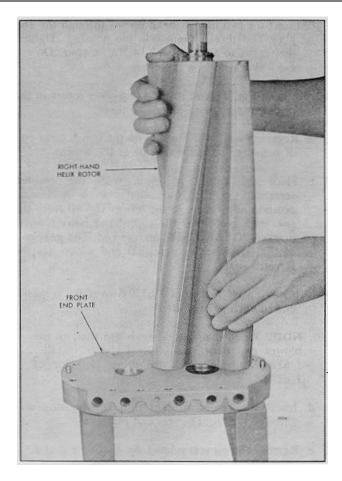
Installing Blower Rotor in Front End Plate (Turbocharged Engine Blowers)
